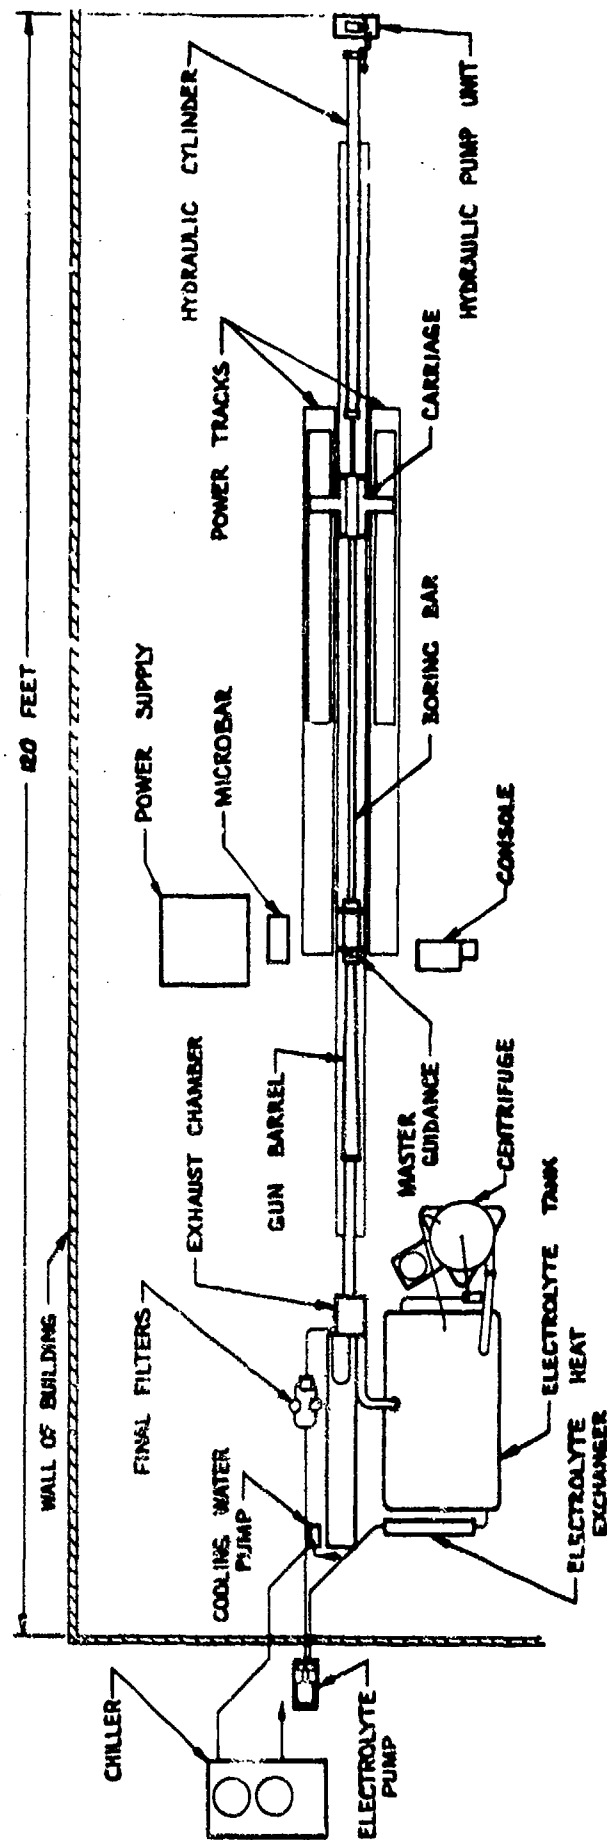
COMPONENT LAYOUT OF ECM MACHINE
